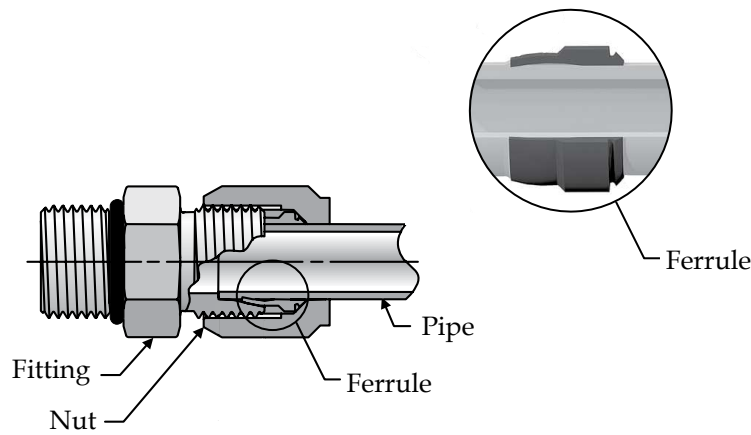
Sleeve attachment with ferrule assemblies. Adapted from: Assembly/Installation section of [64].
